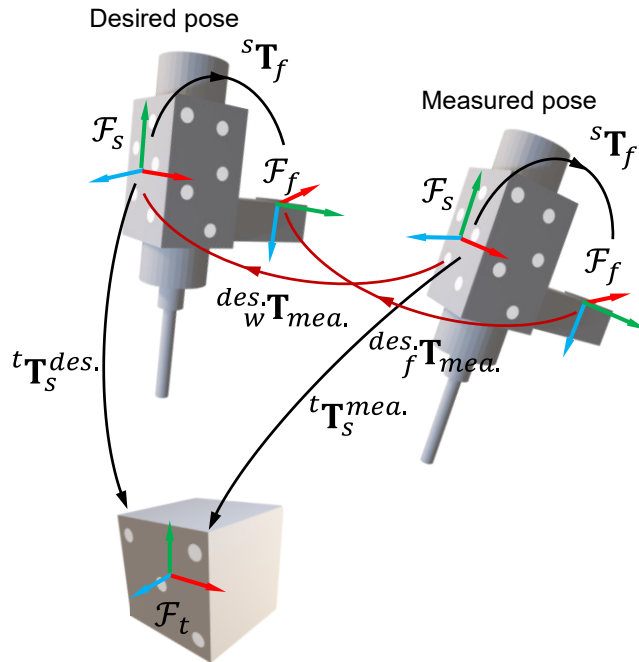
Relative pose error measurement between the drilling spindle and fixture.
